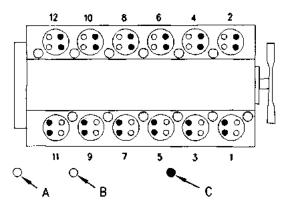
G3612 Engine Design (A) Inlet. (B) Gas admission. (C) Exhaust.
